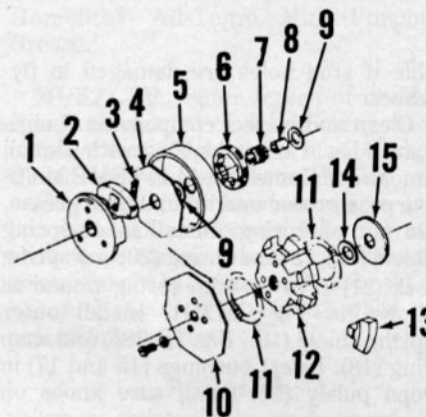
Exploded view of two clutches which may be used on Models 450, 450W, 450HG and 450SL.
